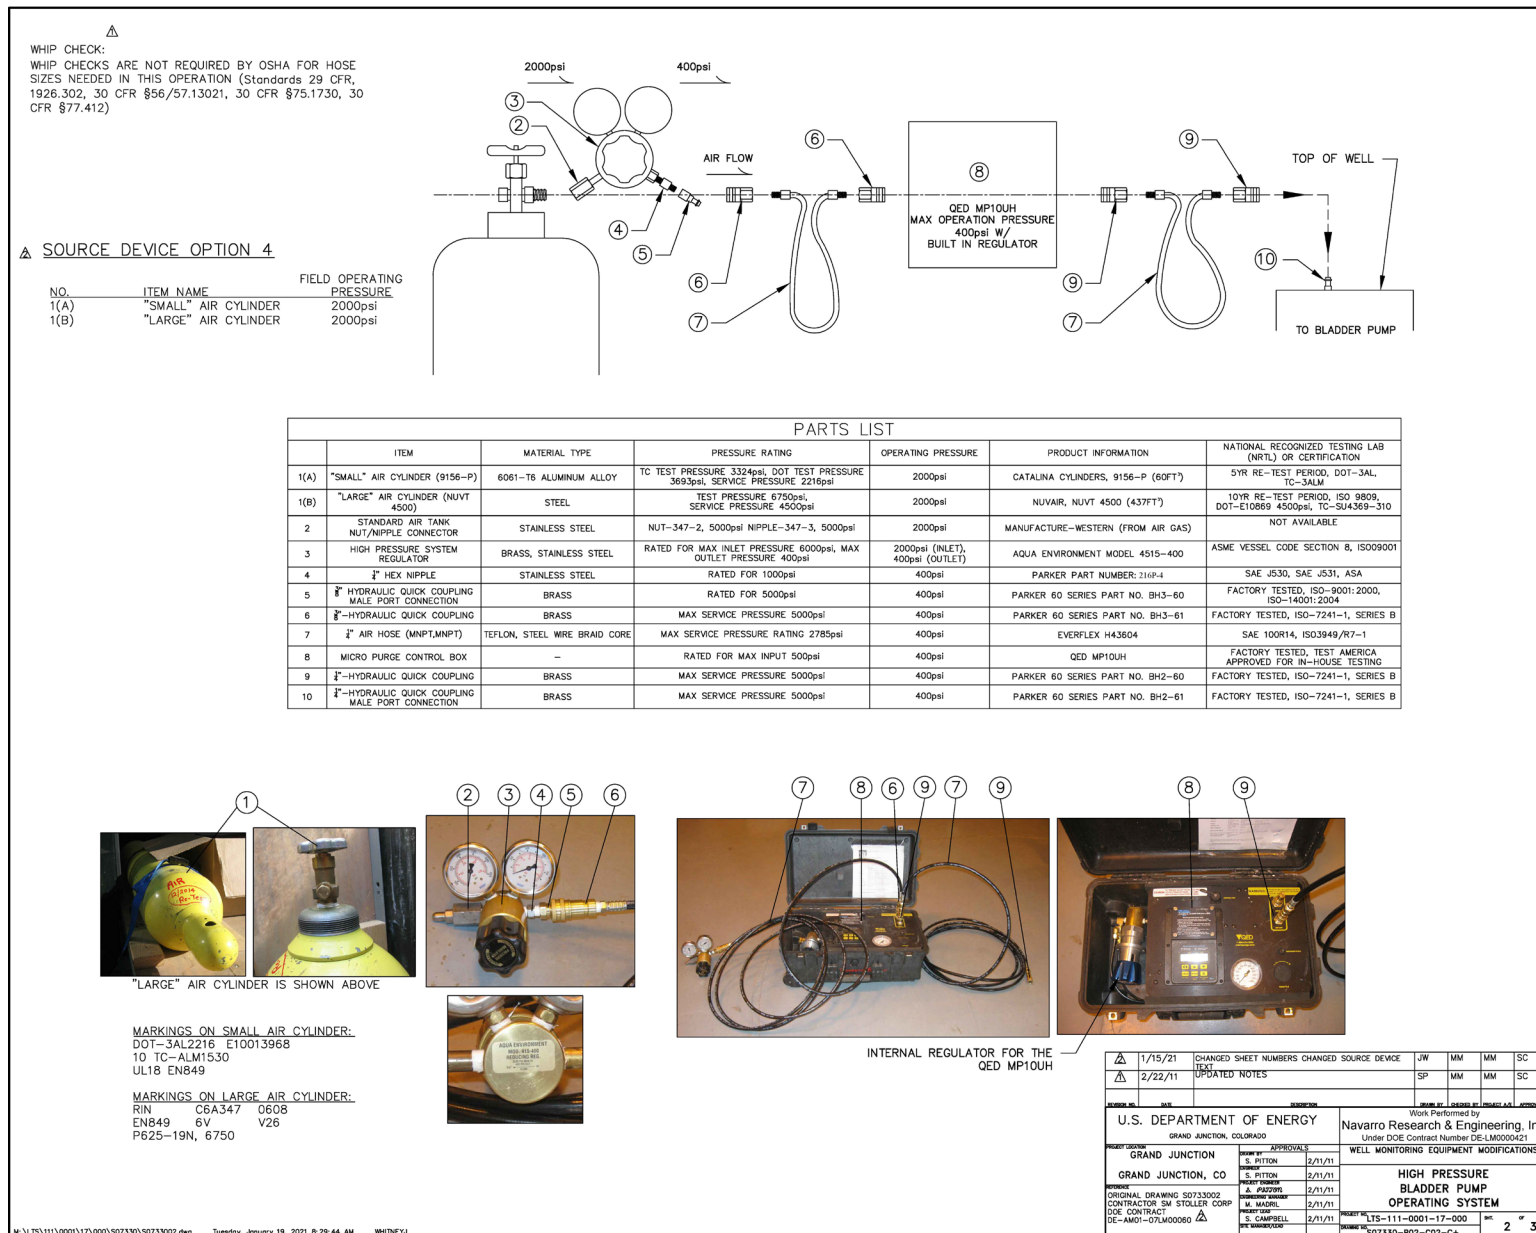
Compressed Air Assembly for MP-10 High-Pressure Controller and System Specifications
